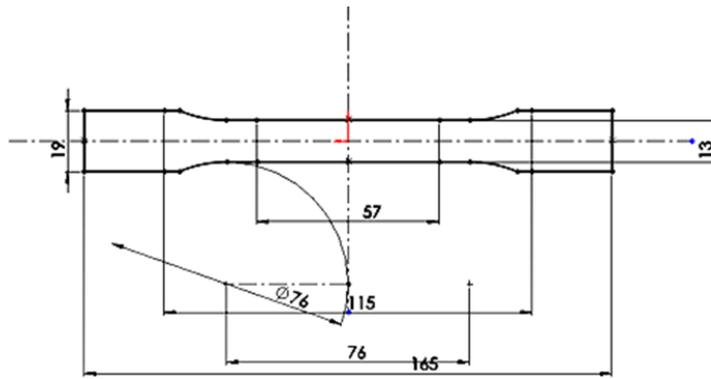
Specimen Dimension as per ASTM D638 for Tensile Test
